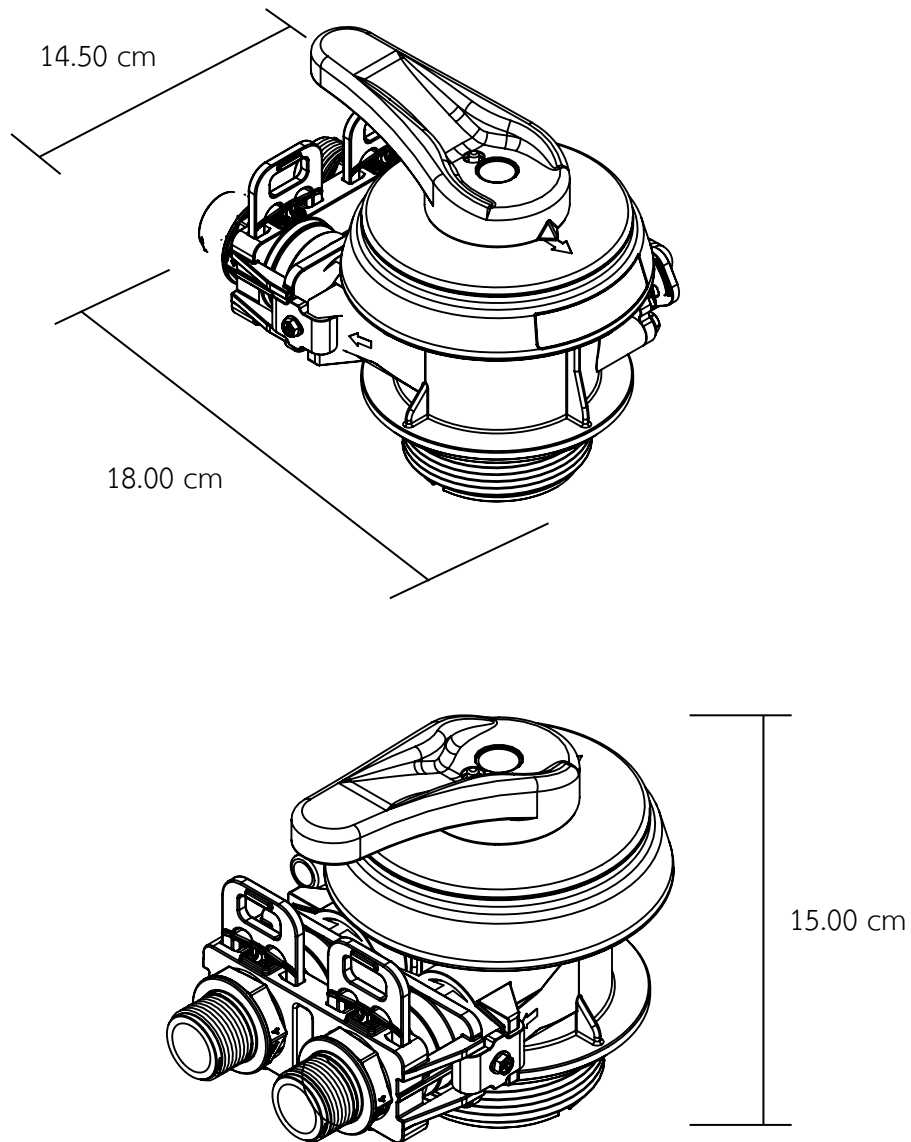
Dimension and Valve Layout model BNT-631M (T) Filter Valve
